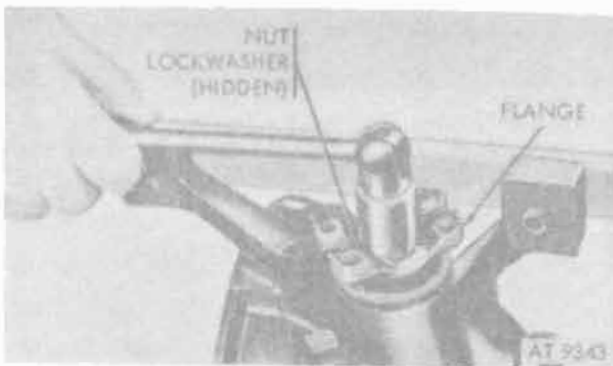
Pinion shaft rear flange nut and lockwasher.
